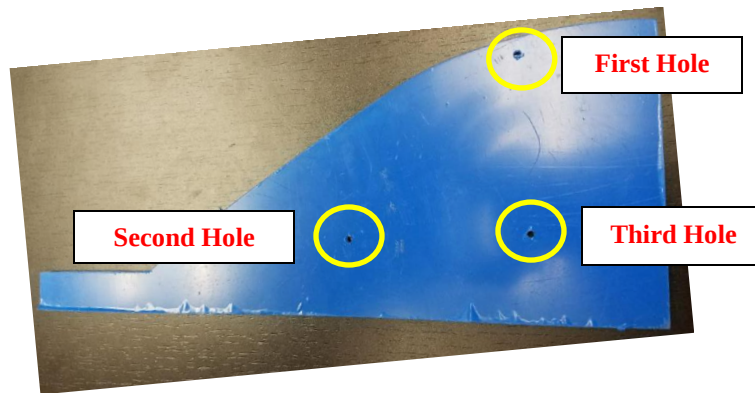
ROLL SERVO DRILL JIG SHOWING OUTBOARD DRILL POSITIONS
